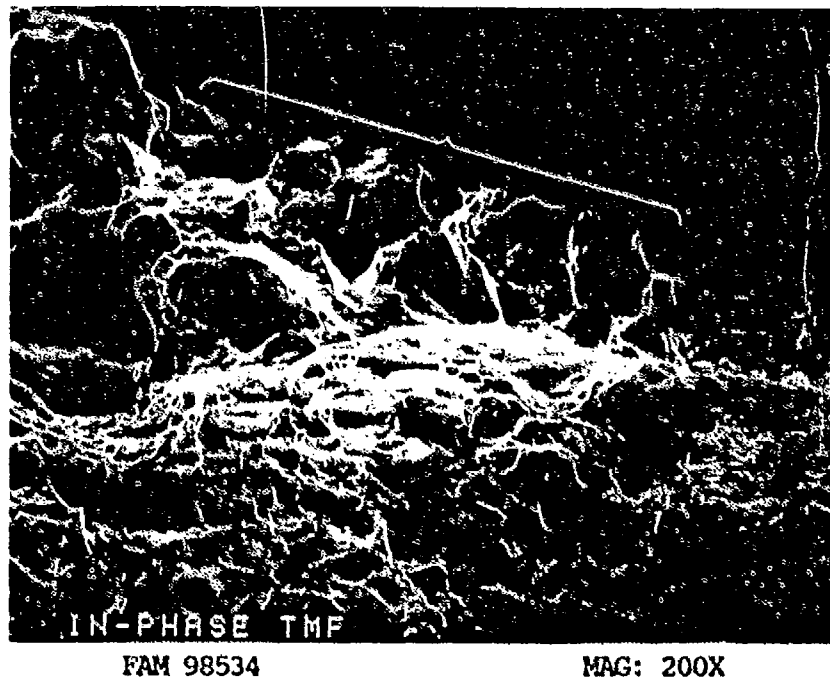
Faceted fatigue area at the I.D. surface of the specimen (brackets) and dimpled overstress near the center of the fracture surface.
